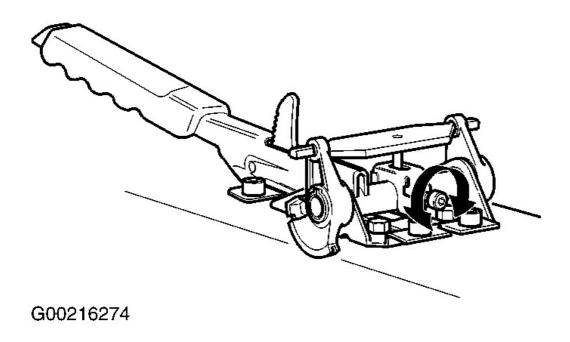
Locating Parking Brake Lever Adjuster Screw Courtesy of VOLVO CARS OF NORTH AMERICA.
